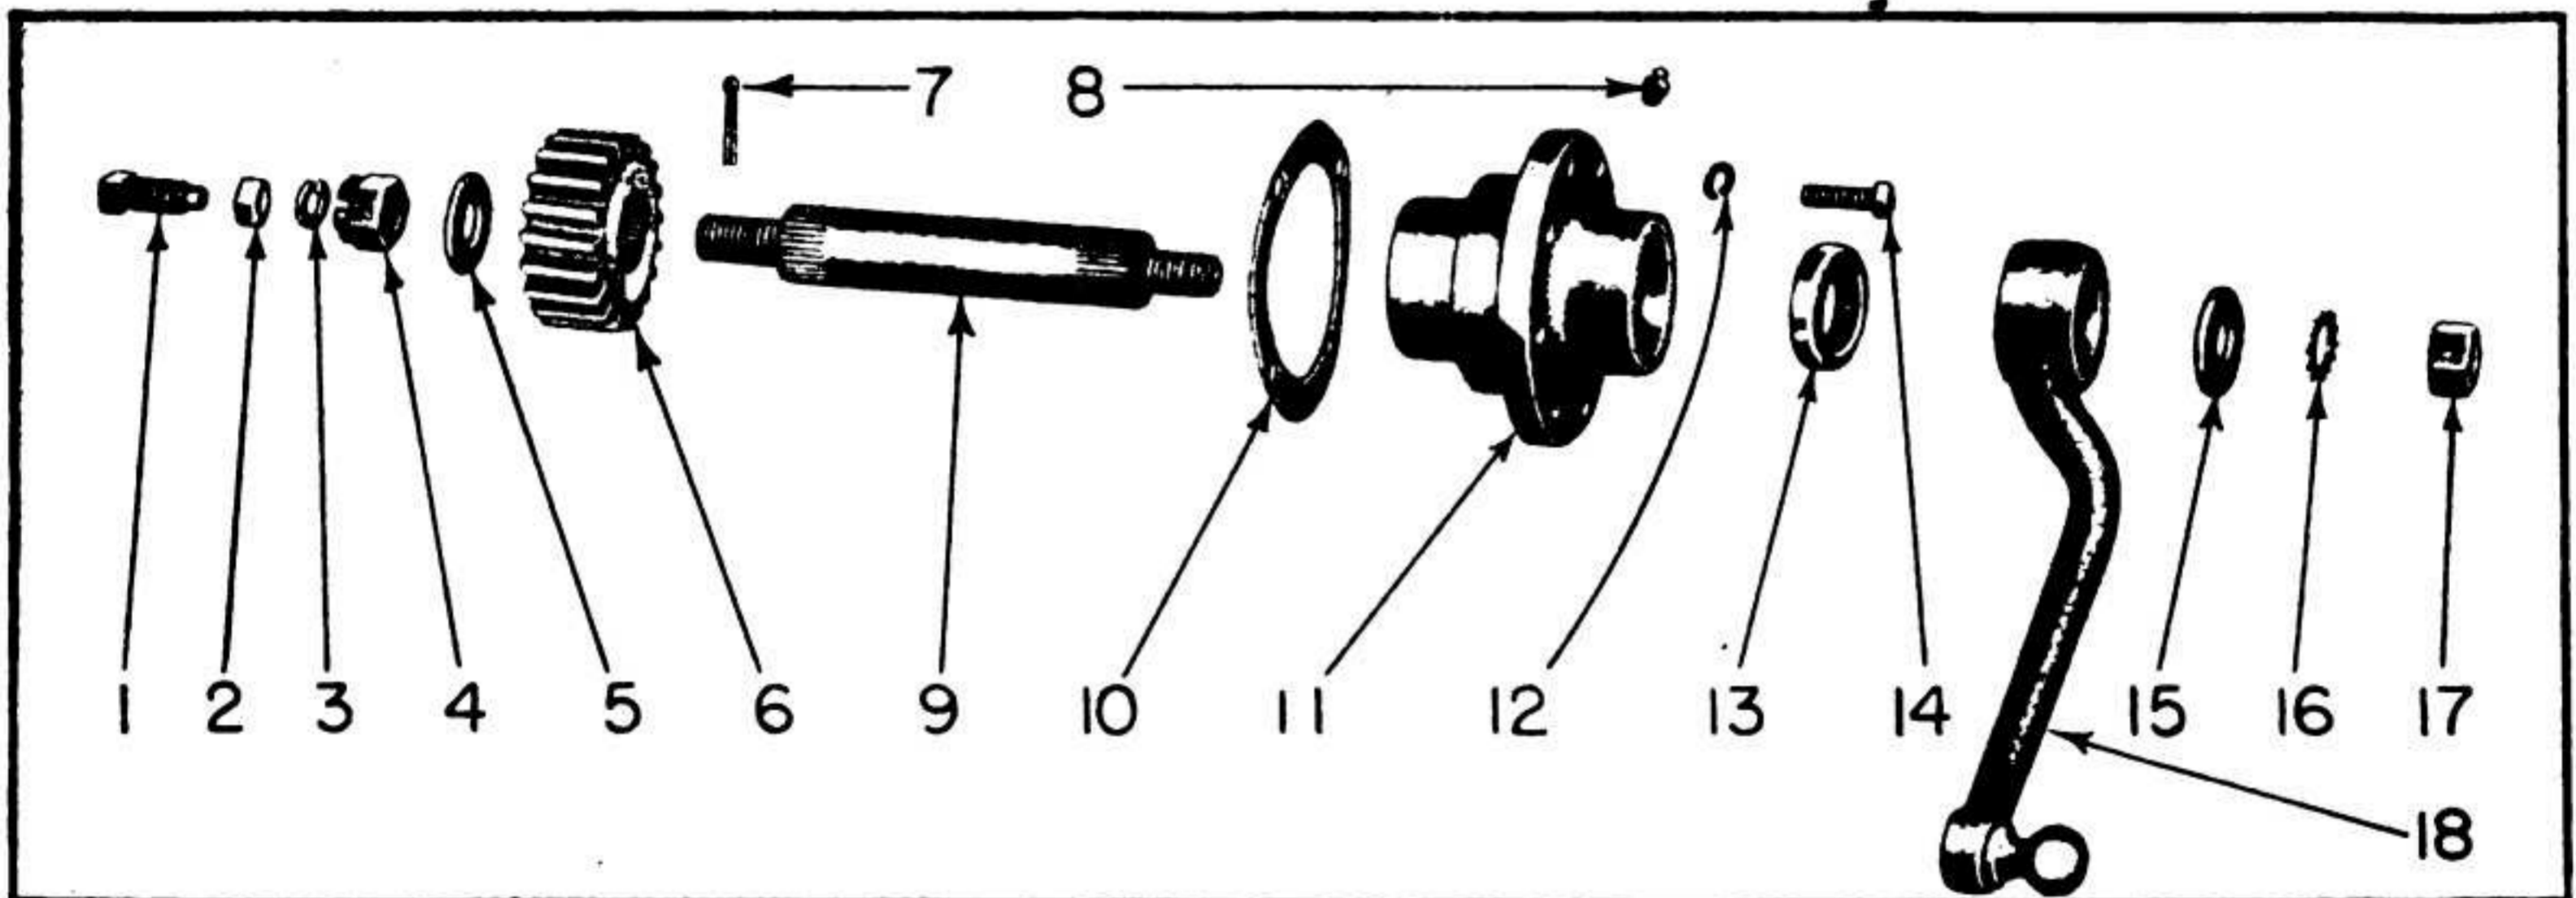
1403 STEERING ADJUSTING SLEEVE AND ARM
